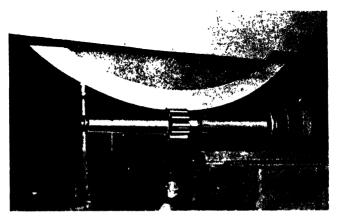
Pinion Grinding on the Lees Bradner Gear Grinder, Employing a 30 in. Diameter Grinding Wheel, Grinding on its Flat Side Face. A Master Gear and Master Rack Control the Roll of the Work
